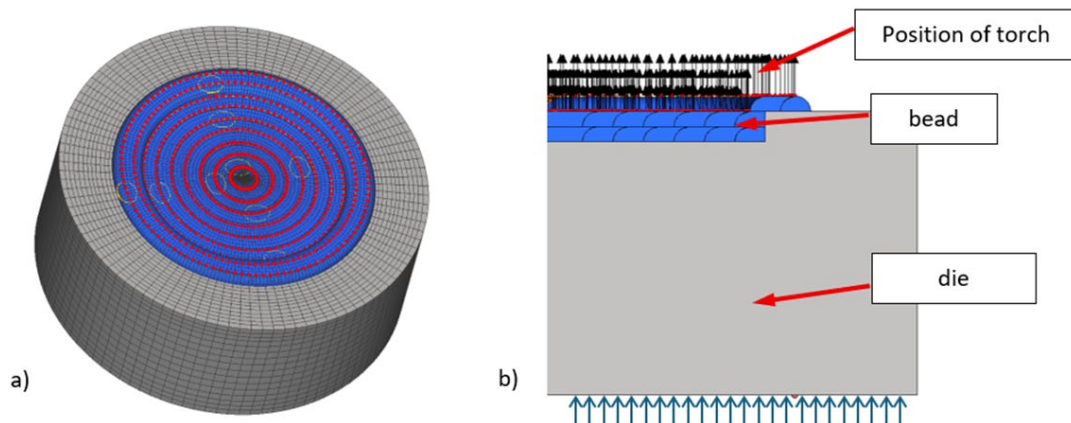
Model of a cylindrical die: a) die geometry with trajectories, b) weld geometry in cross-section, blue arrows indicate the surface fixed to the welding table
